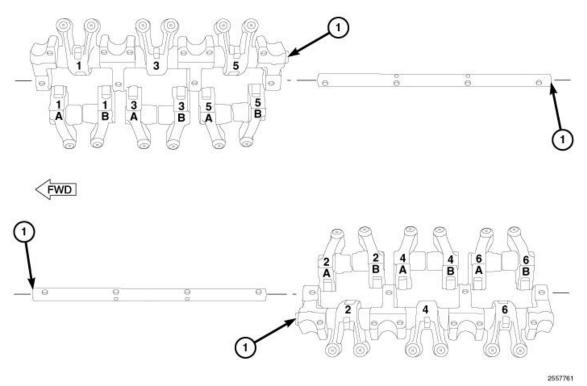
Identification Marks Courtesy of CHRYSLER LLC
